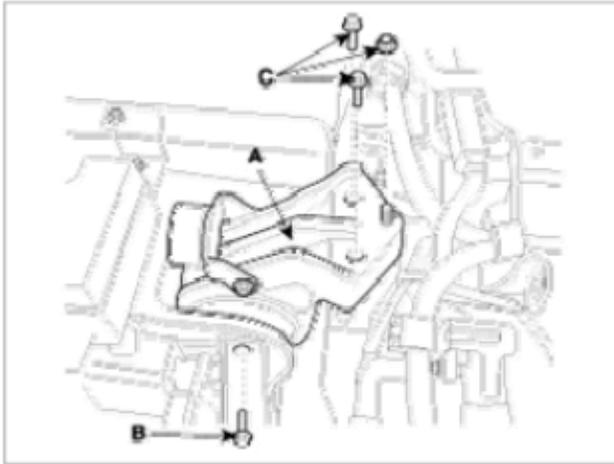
Locating Engine Mounting Bracket, Bolts And Nuts
